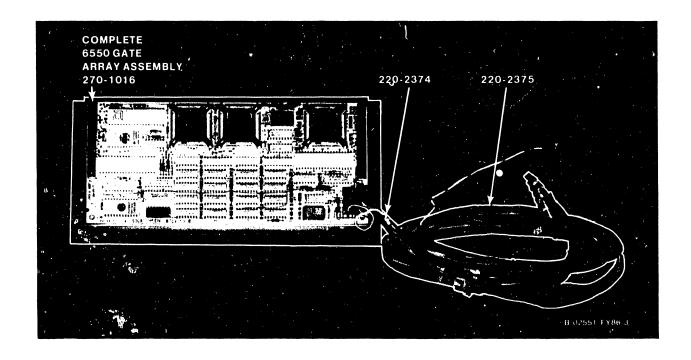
VS-300 Gate Array TC Back Panel Assembly With Cables
